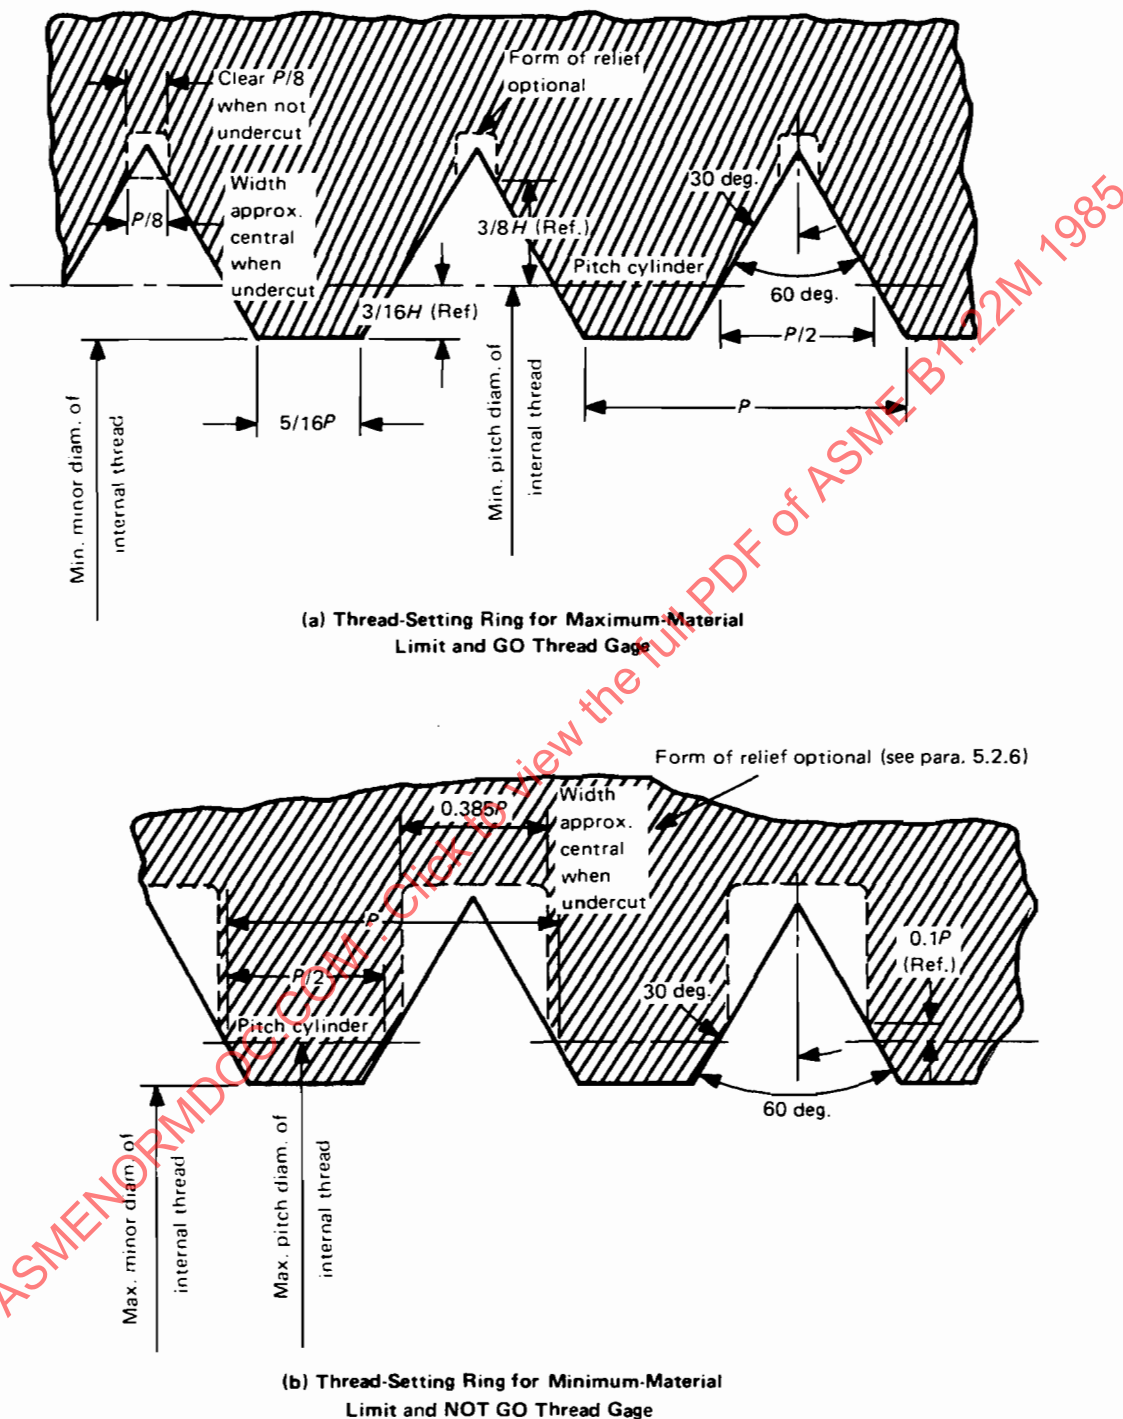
THREAD FORM OF SOLID THREAD-SETTING RING GAGES
